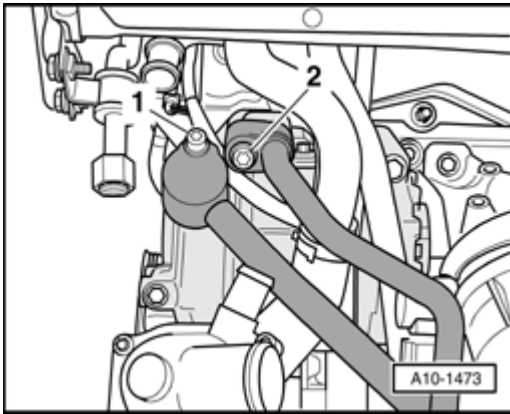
Removing Bolts & Right Refrigerant Line From A/C Compressor
